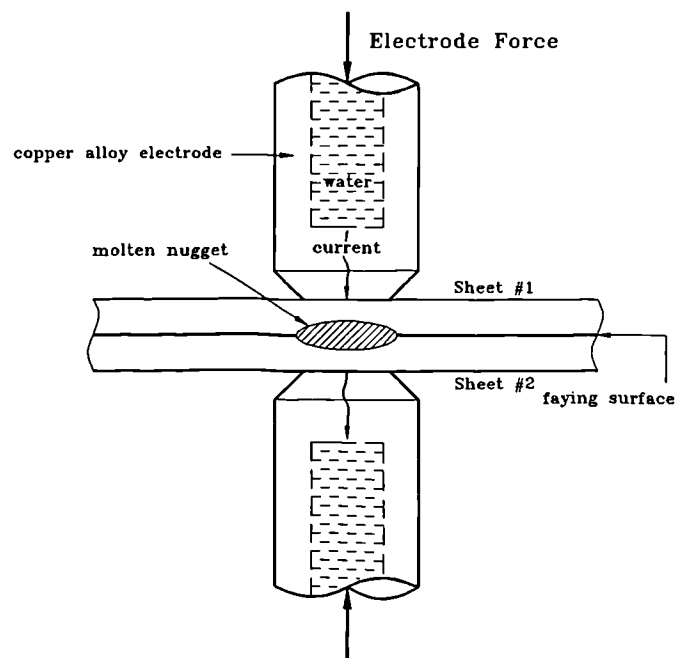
The schematic picture of a single point spot-welding
